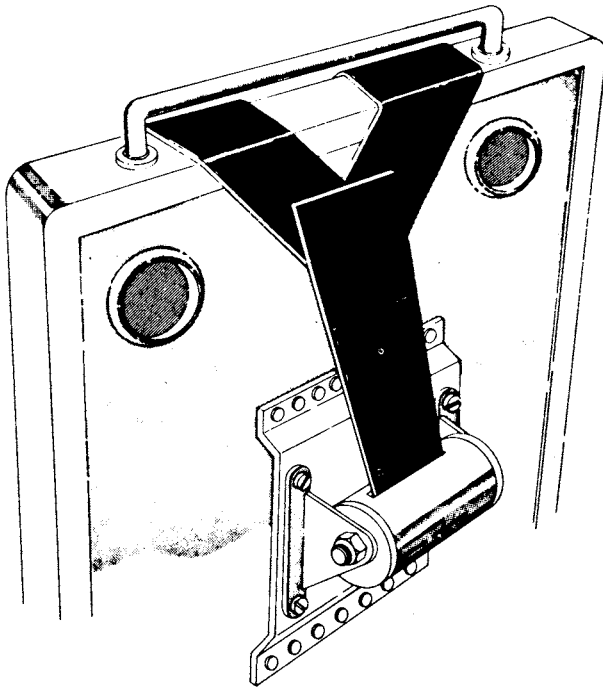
Typical seat mounted inertia reel installation.
